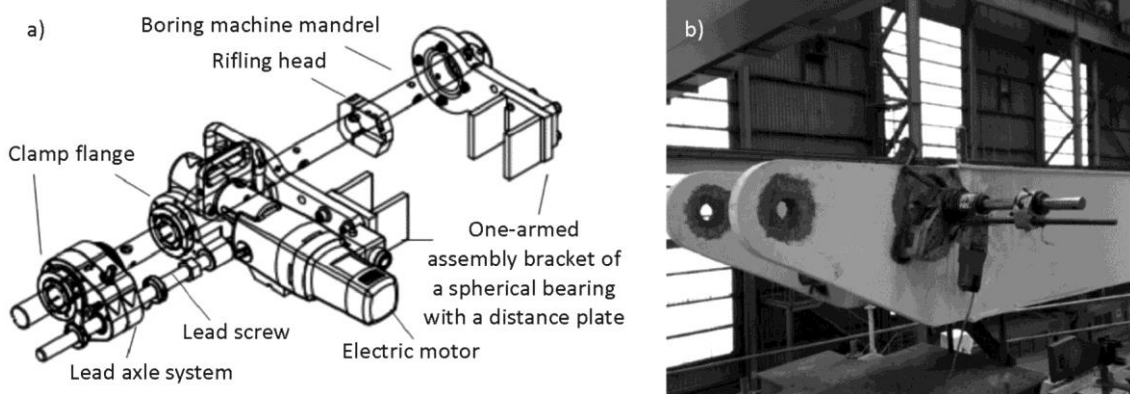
Portable boring machine: a) construction on the example of BB4500; b) boring holes, an example with partial disassembly of the machined object
